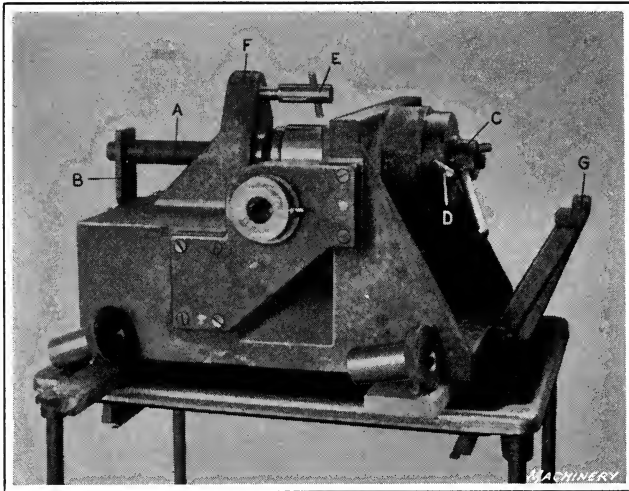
Jig employed in Drilling and Reaming Operations on a Boring Mill
